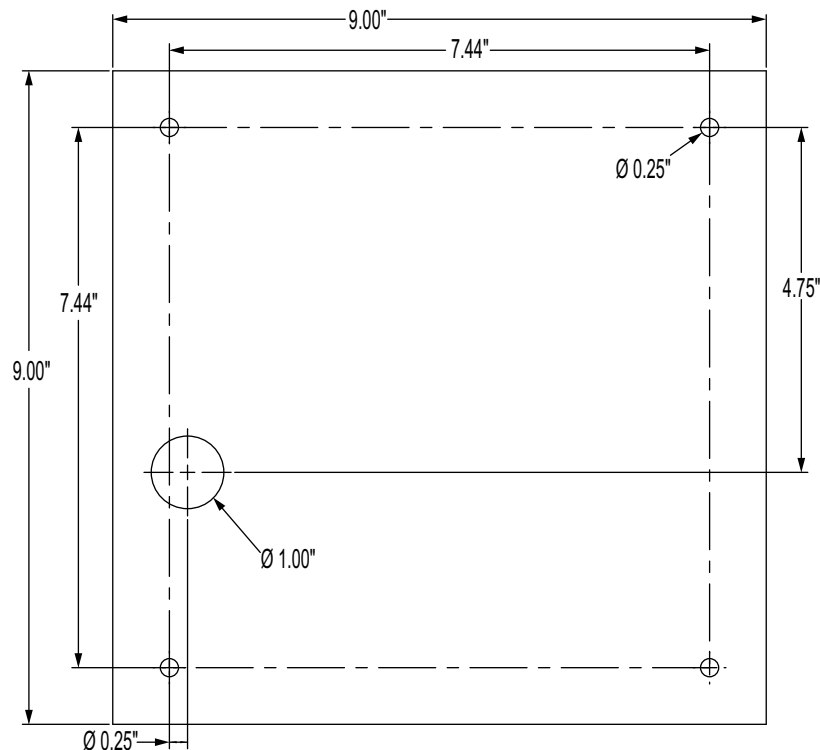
7" Panel Mount (with Keypad) Dimensions
